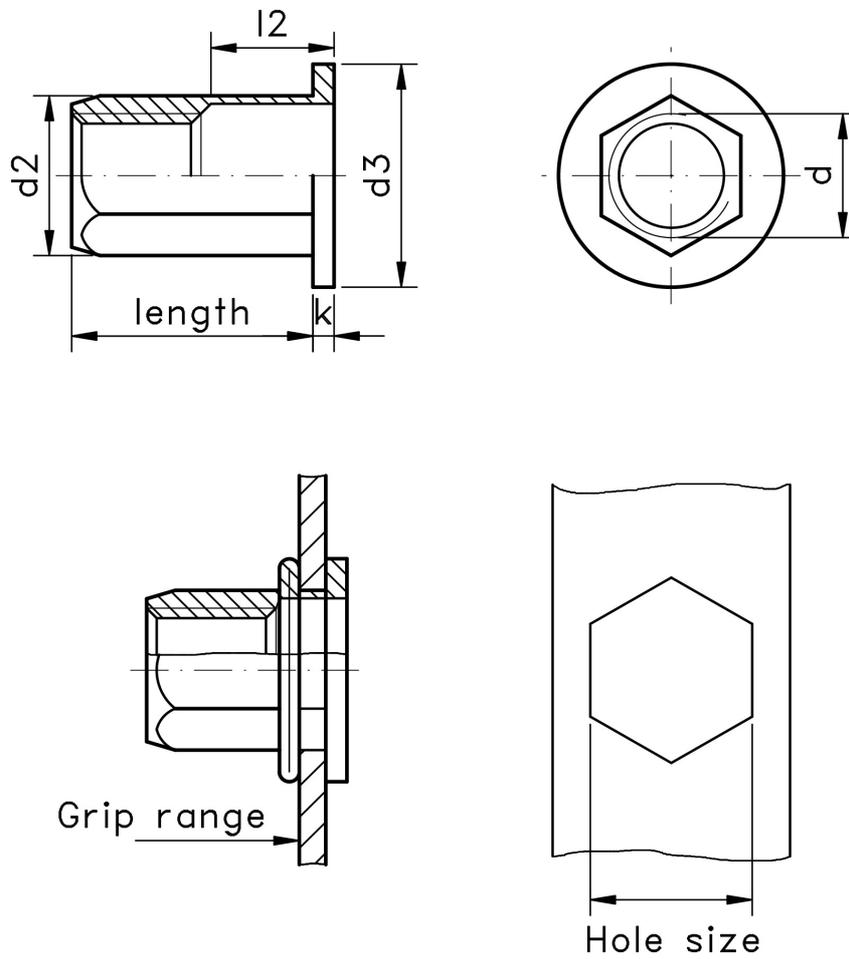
Blind Rivet Nut with Reduced Countersunk Head, Full Hexagonal Shank and Open End
